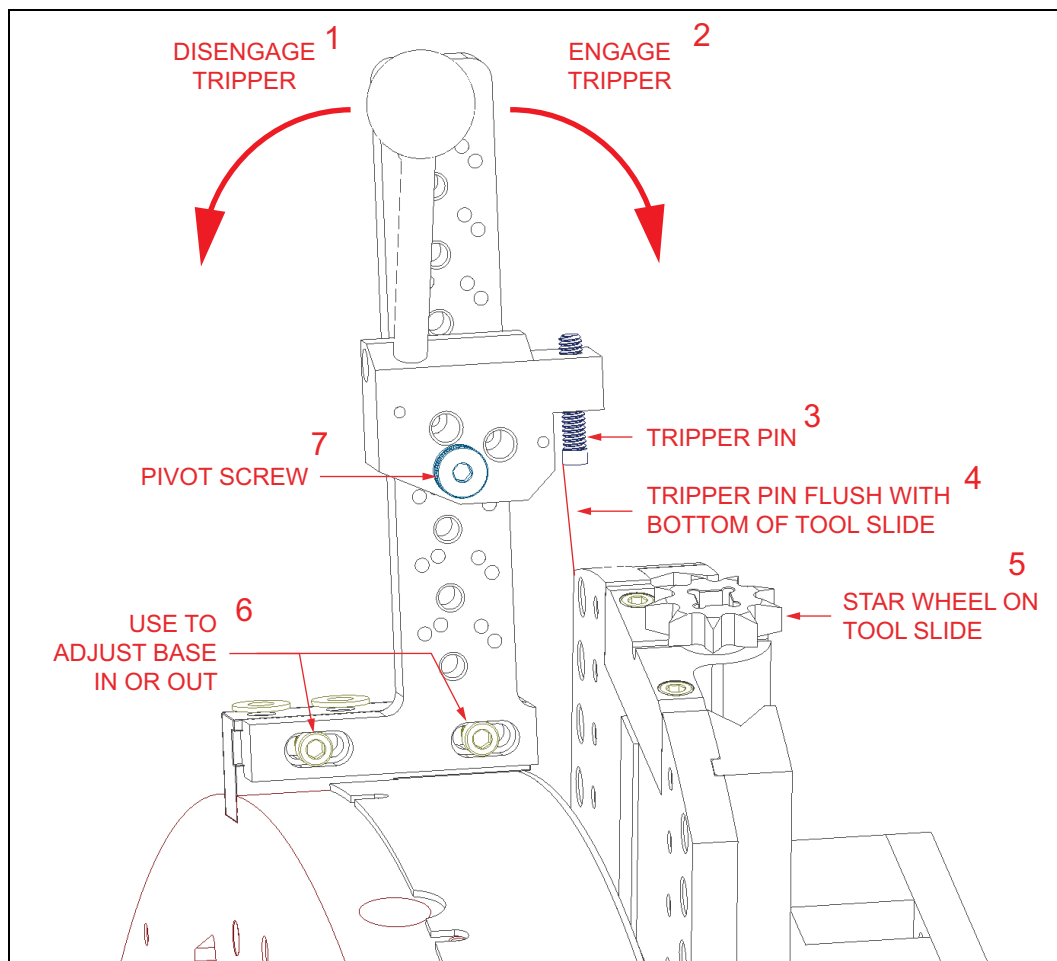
FEED TRIPPER ASSEMBLY
